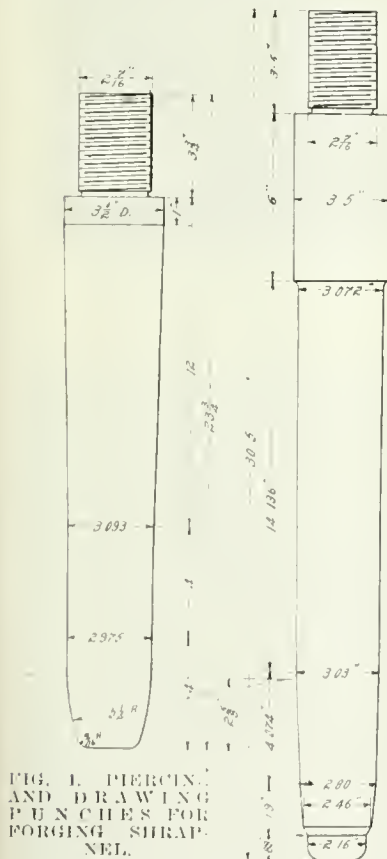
PIERCING AND DRAWING PUNCHES FOR FORGING SHRAPNEL.
